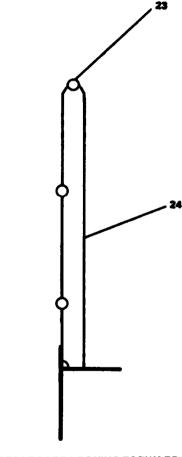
02 Level Ladders and Handrails (Sheet 3 of 4).
